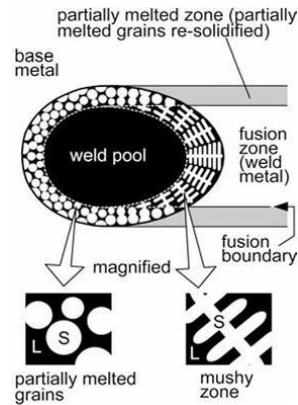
Semisolid materials around weld pool of alloy during welding [30]
